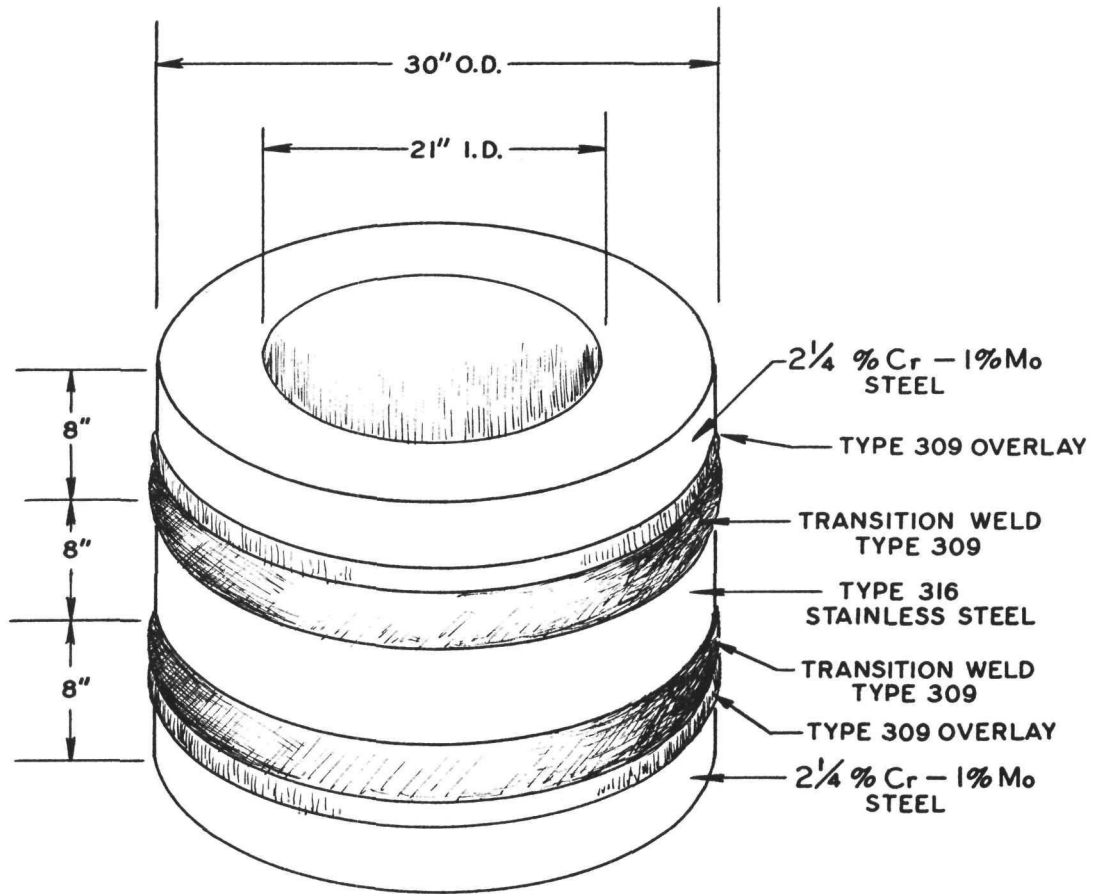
PROTOTYPE ASSEMBLY FOR THERMAL CYCLING TESTS CONTAINING TWO TRANSITION WELDS.
